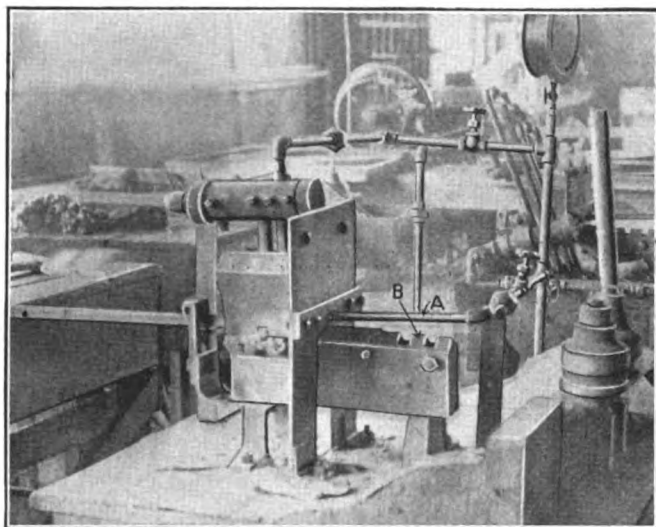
REAR VIEW, SHOWING COOLING PIPE
